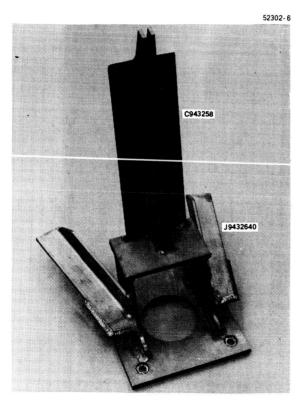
Bracket Mounting and Bracket Support, SW. No. 2
